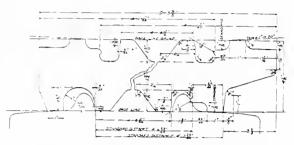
Standard Reference Gage for Mounting and Inspecting Wheels, as Used for Mounting. Sheet 12.
